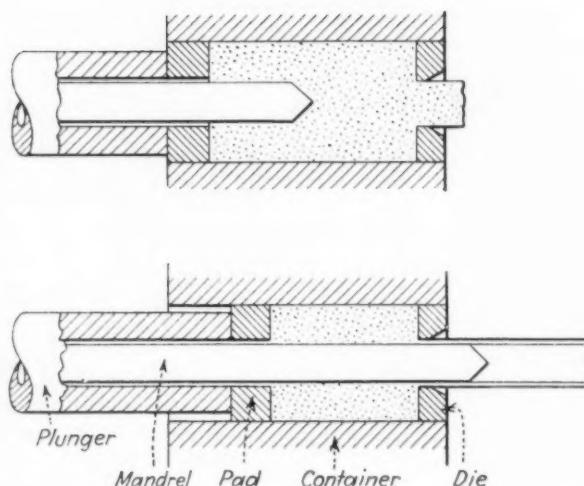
Tube extrusion by use of mandrel. (Above) mandrel advancing and forming bore of tube. (Below) plunger advancing and forming finished tube over mandrel.
